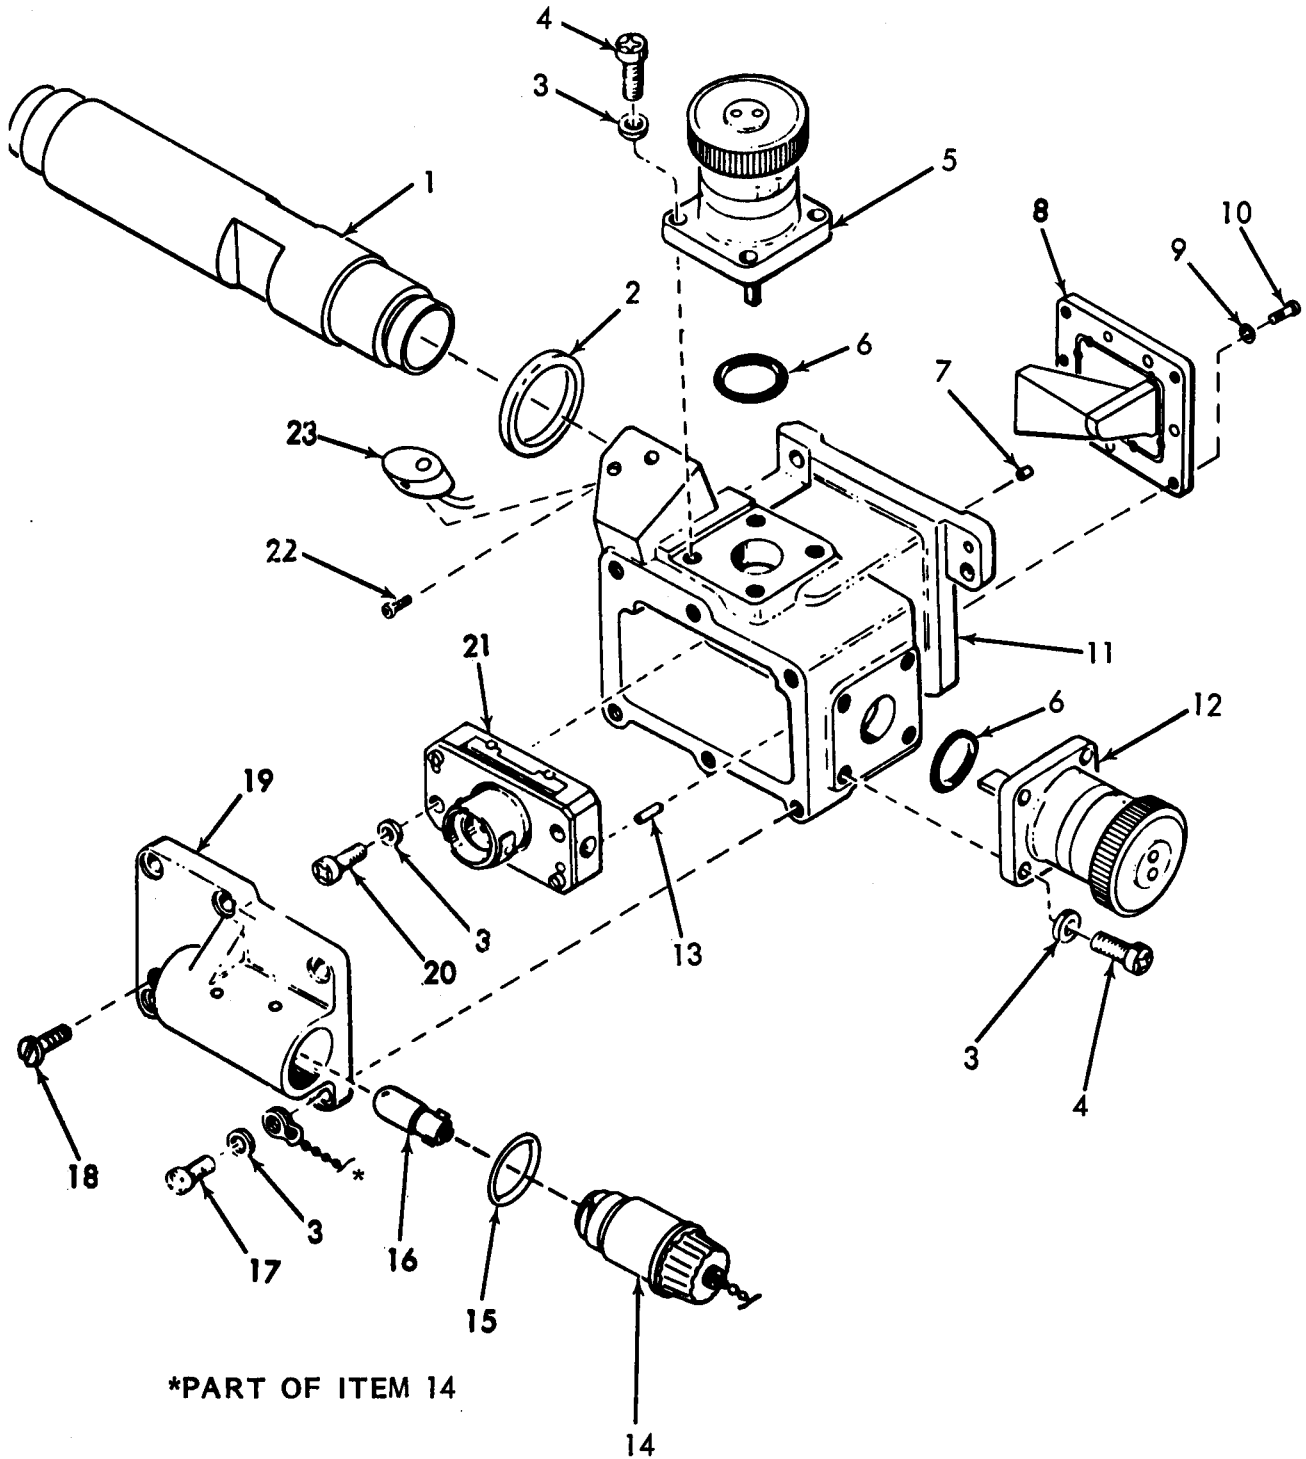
Body assembly (infrared) 11743800 (partial view-back)
